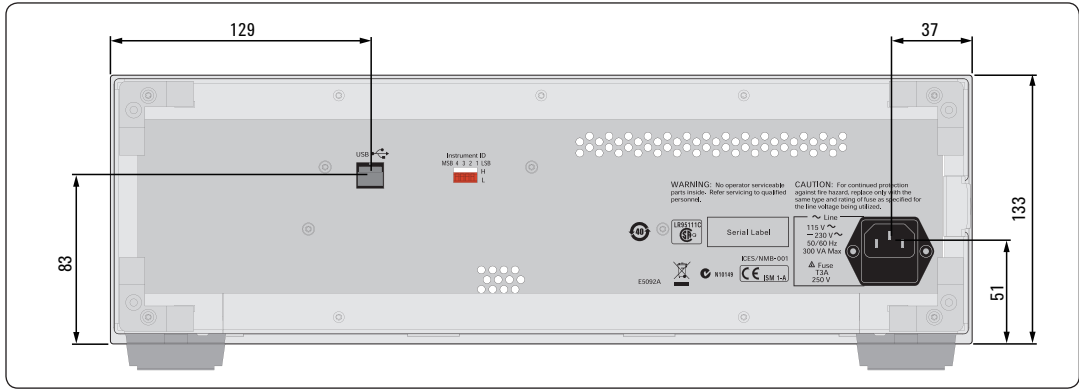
Dimensions (rear view, with Option E5092A-020, in millimeters, nominal)
